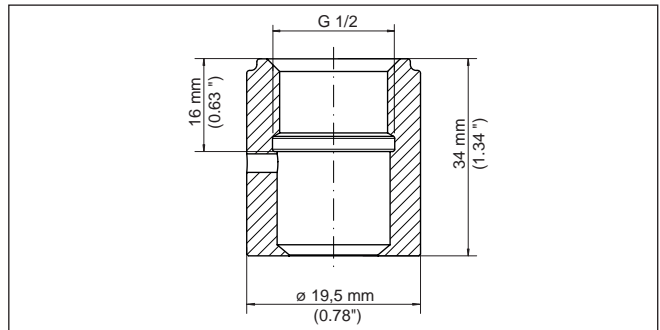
Dimensions direct welded socket G $\frac{1}{2}$ - Cone seal
